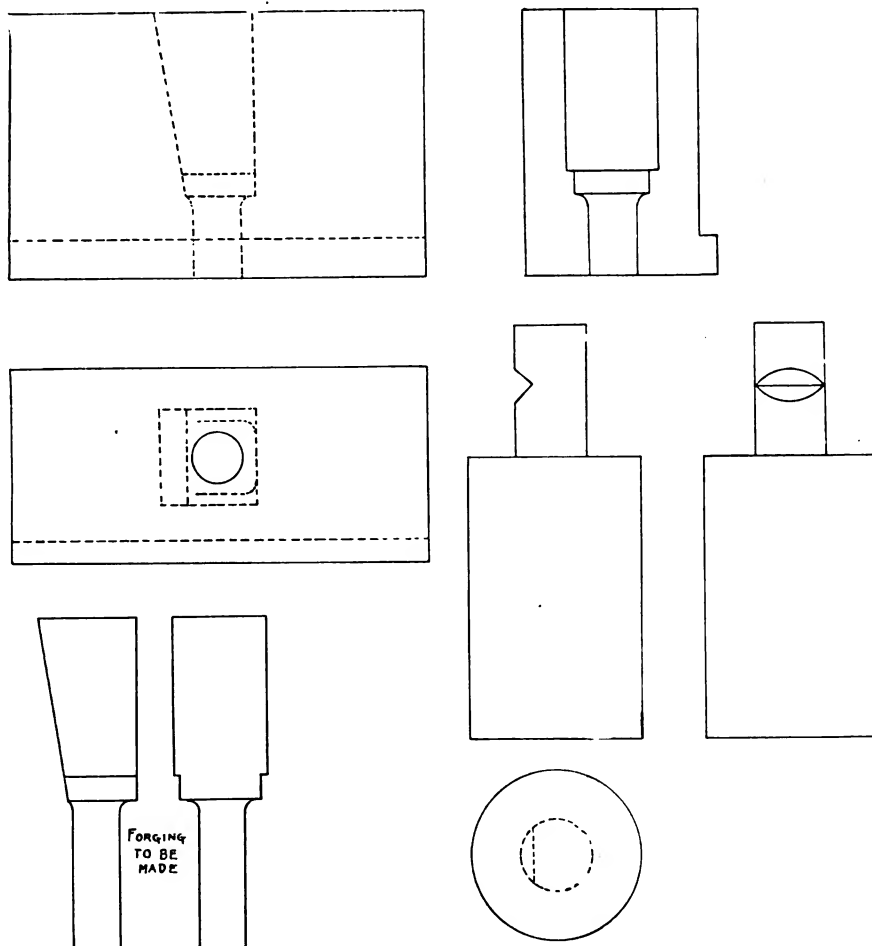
DIES AND PLUNGER FOR FORGING FRONT END MAIN ROD KEYS
